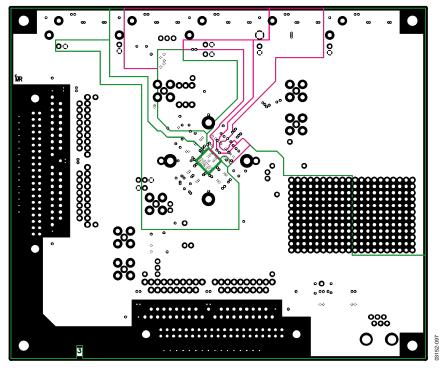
PCB Assembly, Layer 3 Metal (Power Plane), Rev F Evaluation Board
